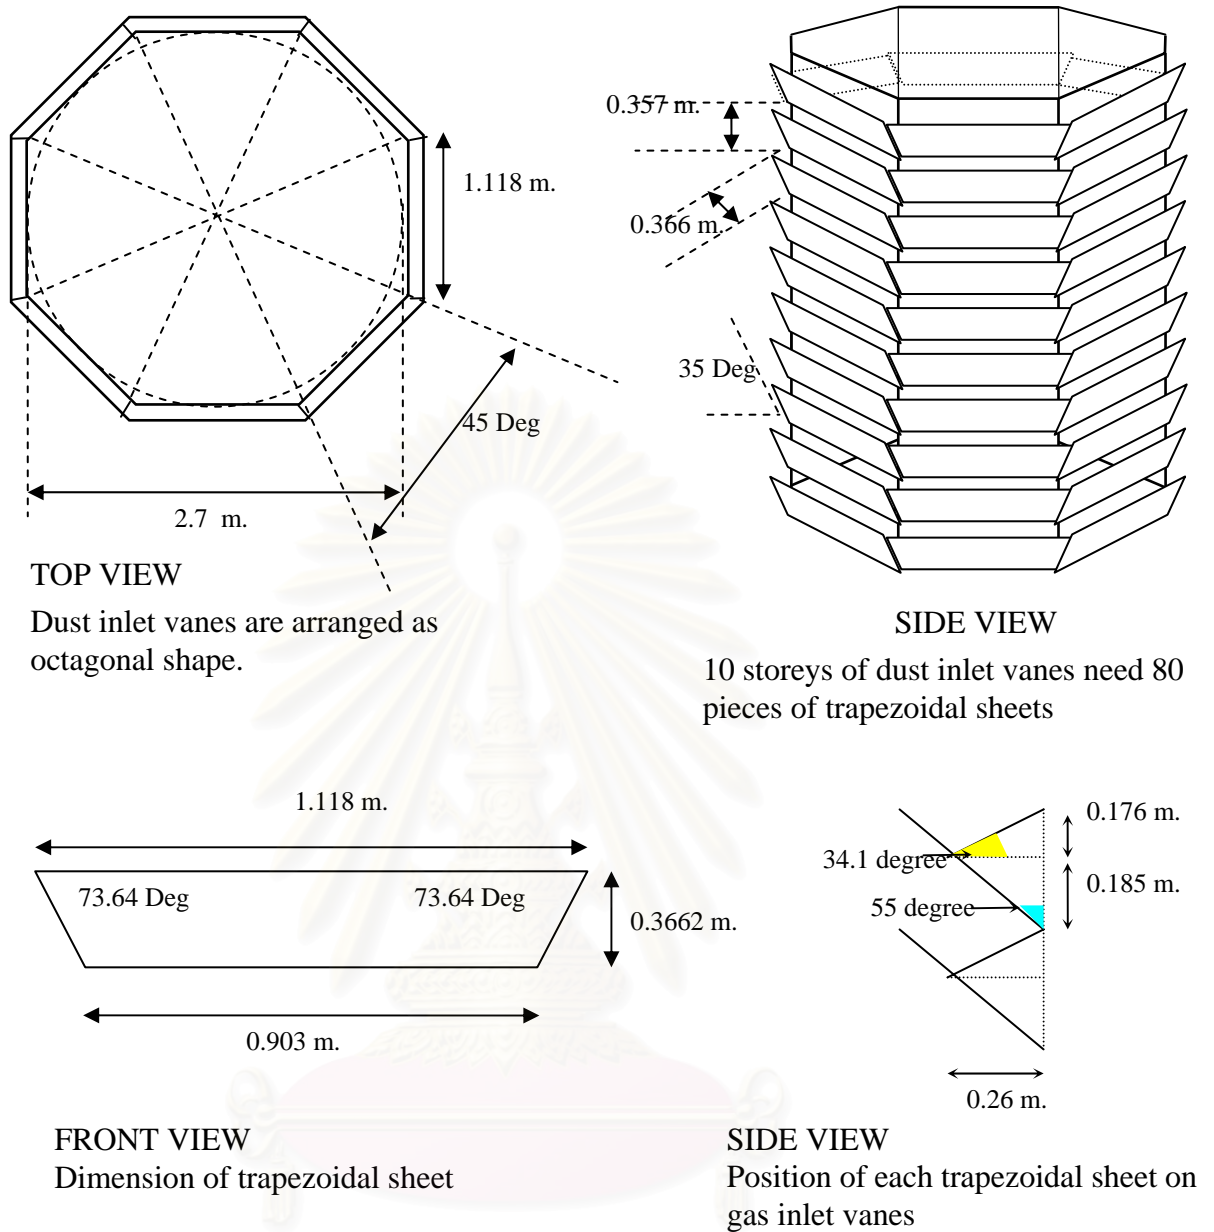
Dimension of gas inlet vanes and trapezoidal sheet.
